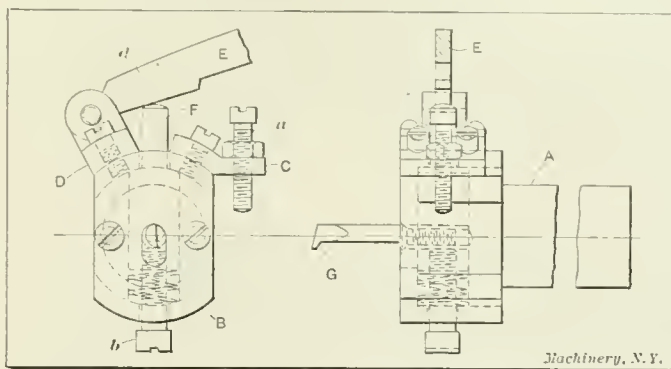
A Recessing Tool-holder of Simple Design for Screw Machines
